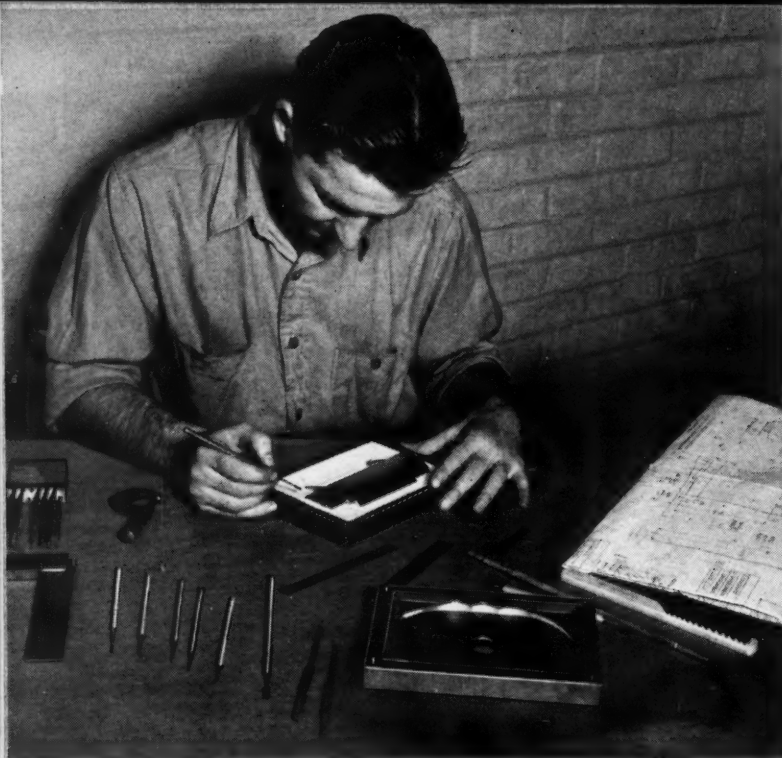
A master pattern, made to close tolerances in accordance with finished-part specifications, is embedded in plaster-of-paris in one half of a flask preparatory to casting a master mold
